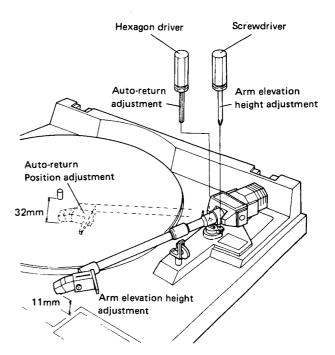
Arm elevation height adjustment and auto-return adjustment
